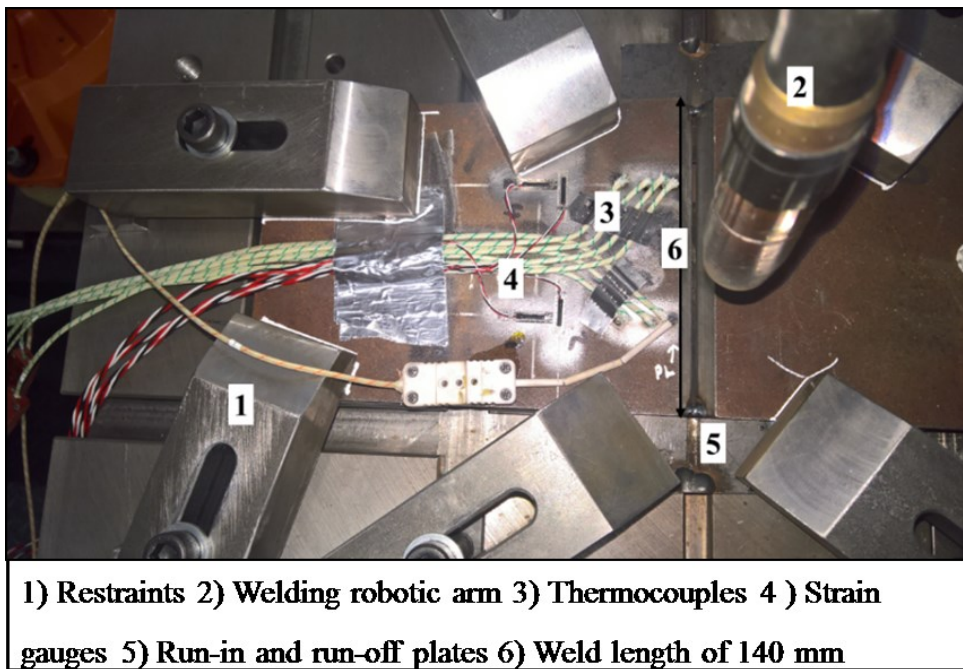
Photograph showing the welding set-up used for manufacturing the butt-welded plate with the short weld.
